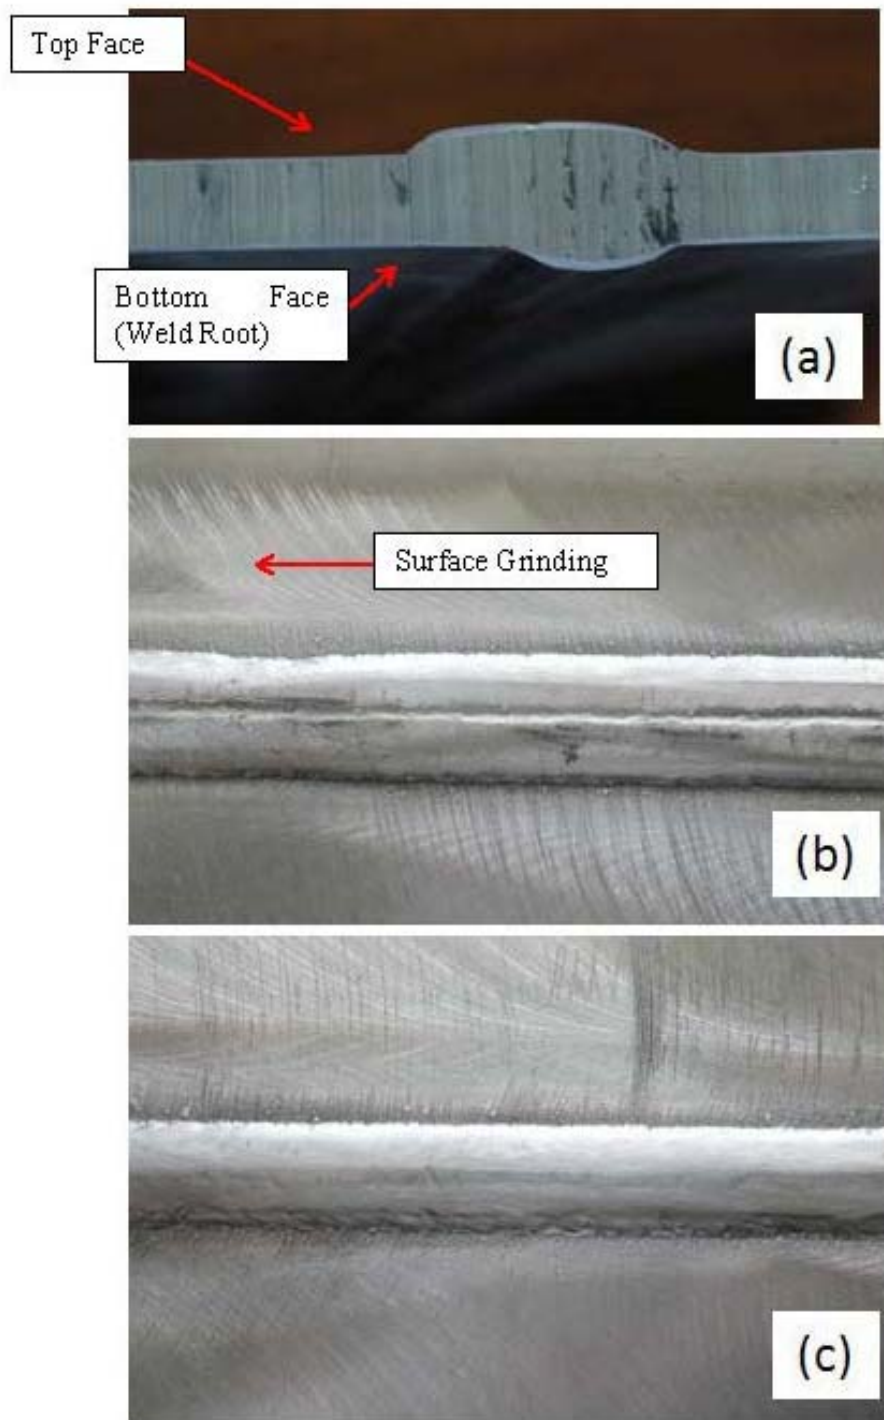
Welded Plate (a) side view (b) top face (c) bottom face (weld root).(From [1])
